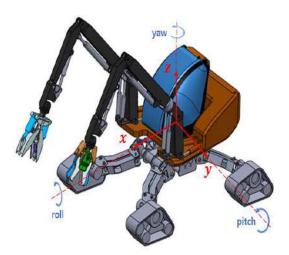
Independently Driven Quadruped Crawler Robot with integrated lower and upper body
